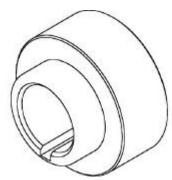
Front Crankshaft Seal Installer 8348 Courtesy of CHRYSLER LLC
